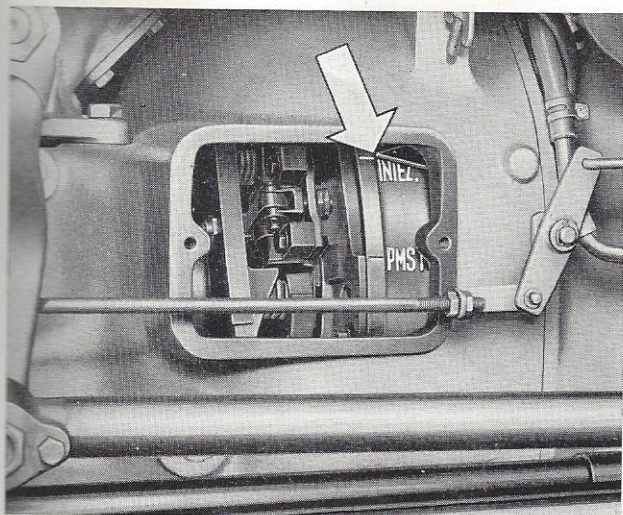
Reference mark on flywheel indicating injection advance ( $21^\circ$  before T.D.C.).
